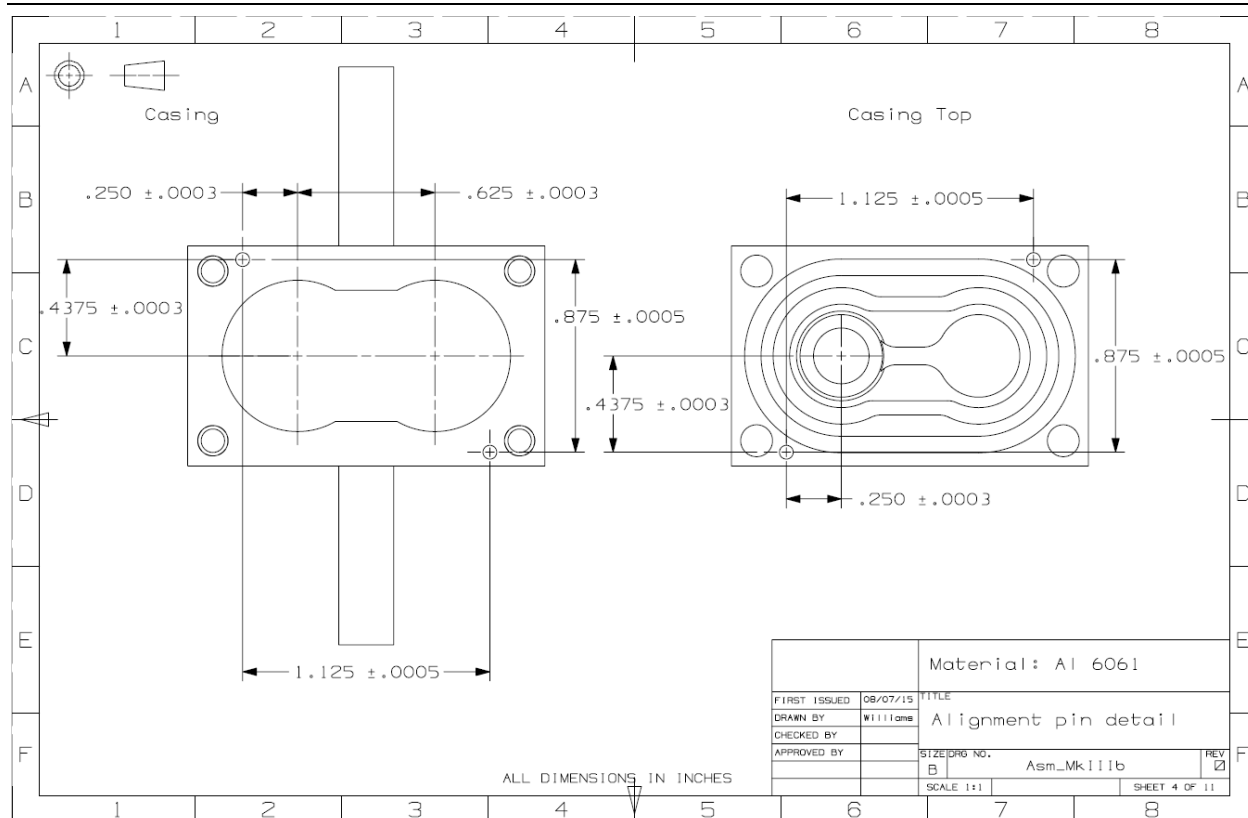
Example fabrication drawing showing feature placement in relation to the alignment holes for the central casing element (*left*) and the top end plate (*right*)
